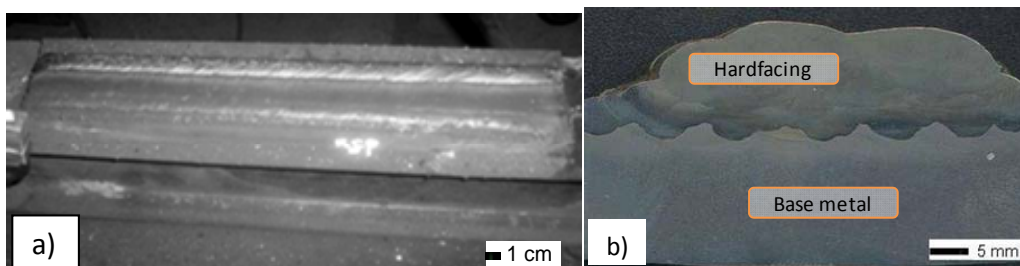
a) Welded coupon, b) Transversal sections of welded coupon.
